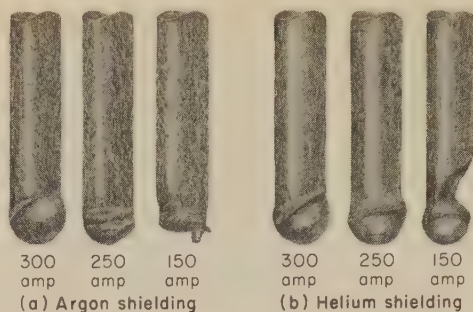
Ends of pure tungsten electrodes after welding at three levels of current, with argon or helium shielding
